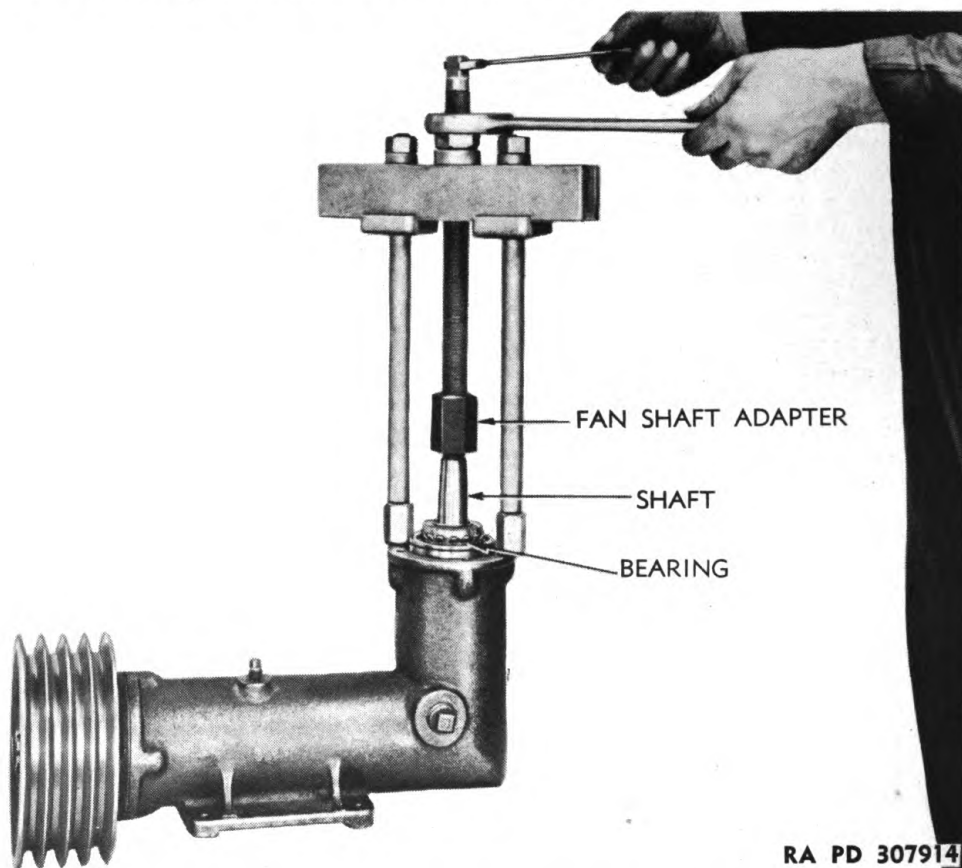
Pulling Fan Drive Shaft and Bearings, Using Puller 41-P-2905-60 and Adapter 41-A-18-165
